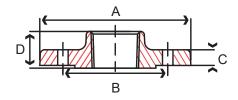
TH2 & 18TH2 - 250 lb. Threaded Companion Flange
